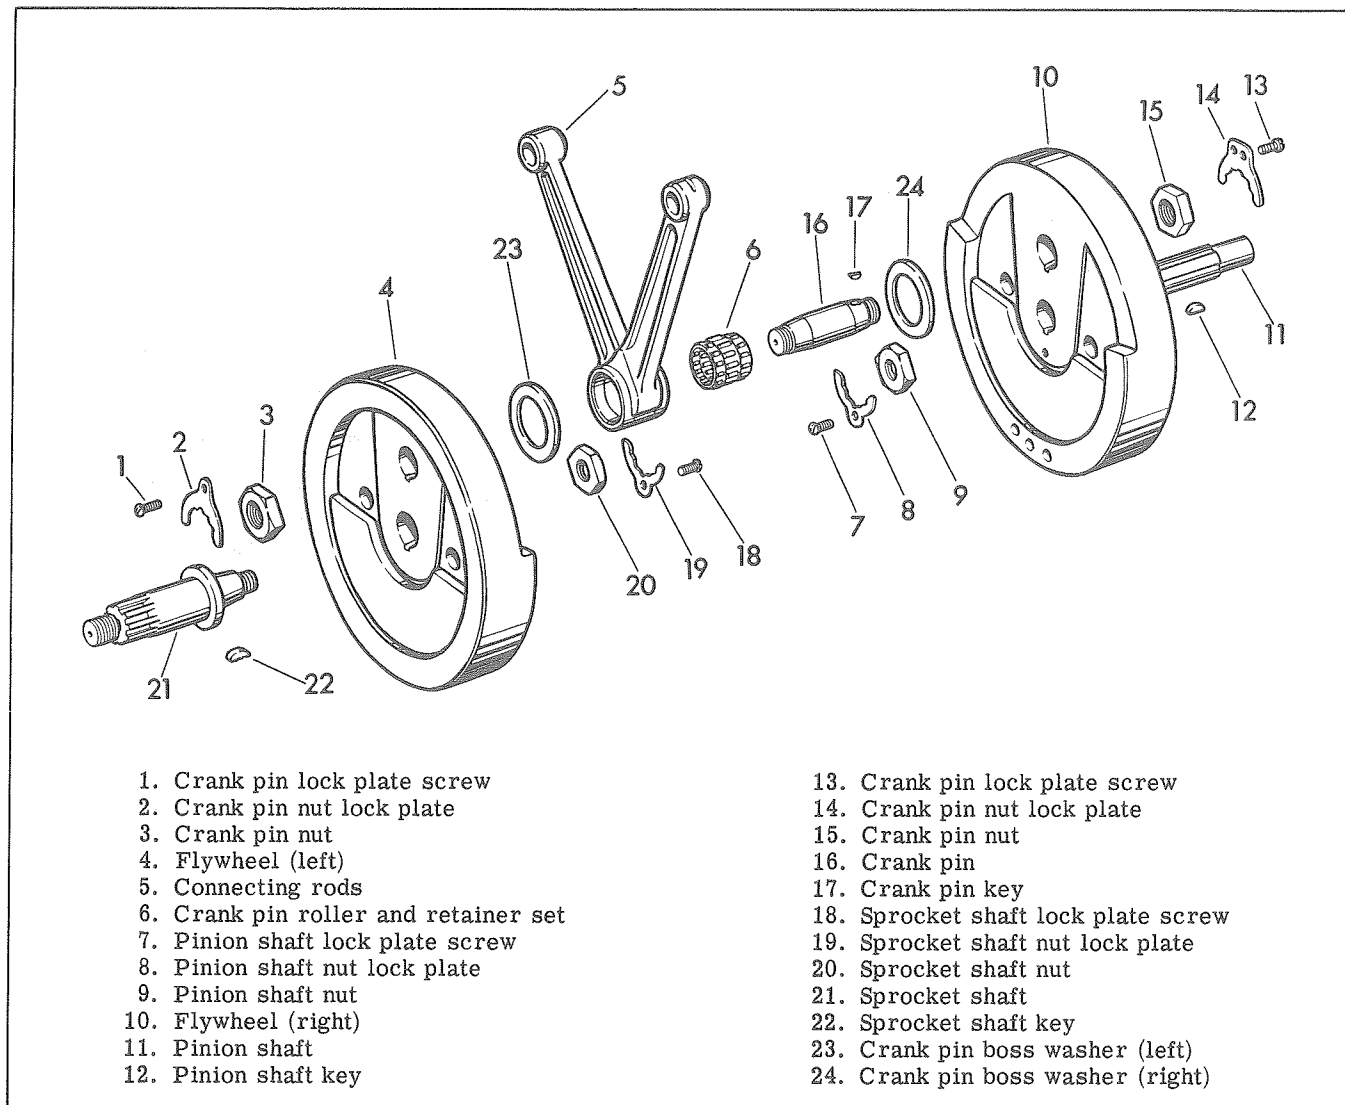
E-22. Flywheel and Connecting Rod Assembly - Exploded View
